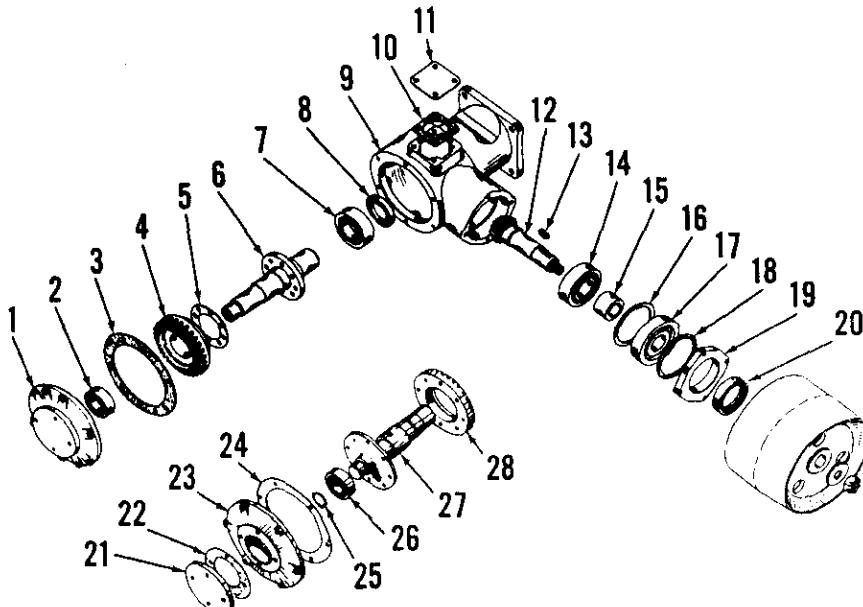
Exploded view of the belt pulley unit. Drive is taken from pto shaft. Items 4 through 6 are used for clockwise rotation and items 27 and 28 are used for counter-clockwise rotation. Items 21 through 25 are used on early models.
